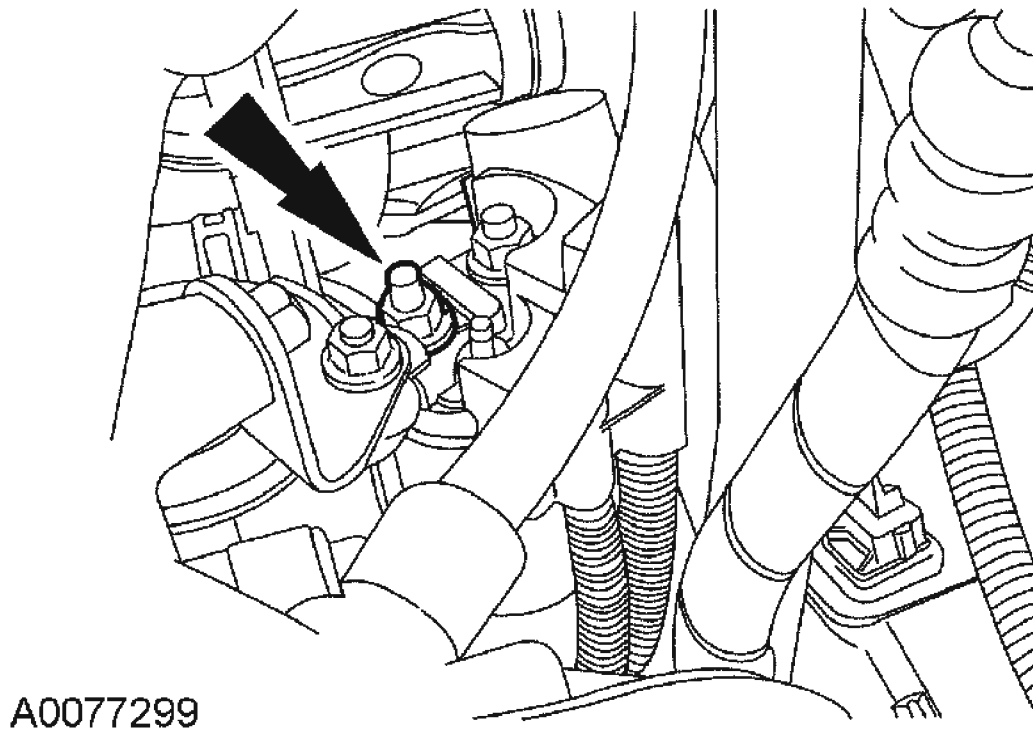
Removing Starter Nuts And Disconnecting Wiring From Starter
